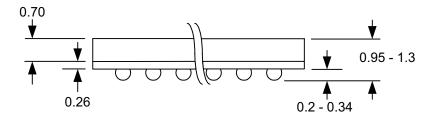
MQ-1100 BGA Package - Side View with Dimensions in Millimeters
